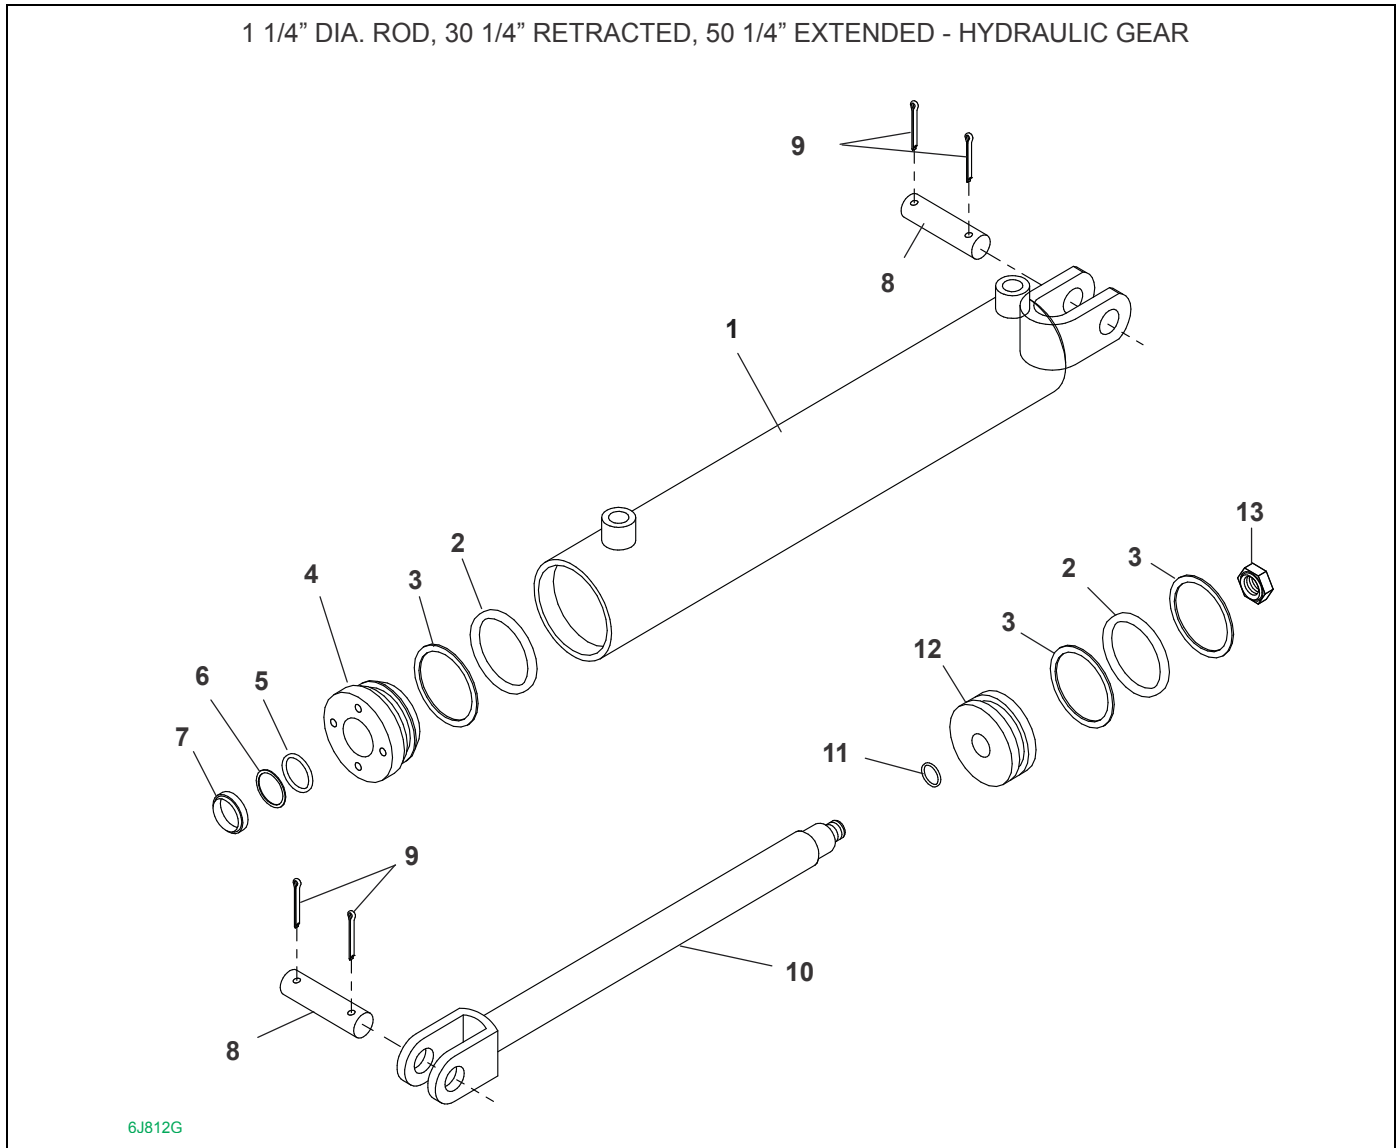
Hydraulic Cylinder Assembly, 2-1/2" X 20" - Prior to 1/15/2008
